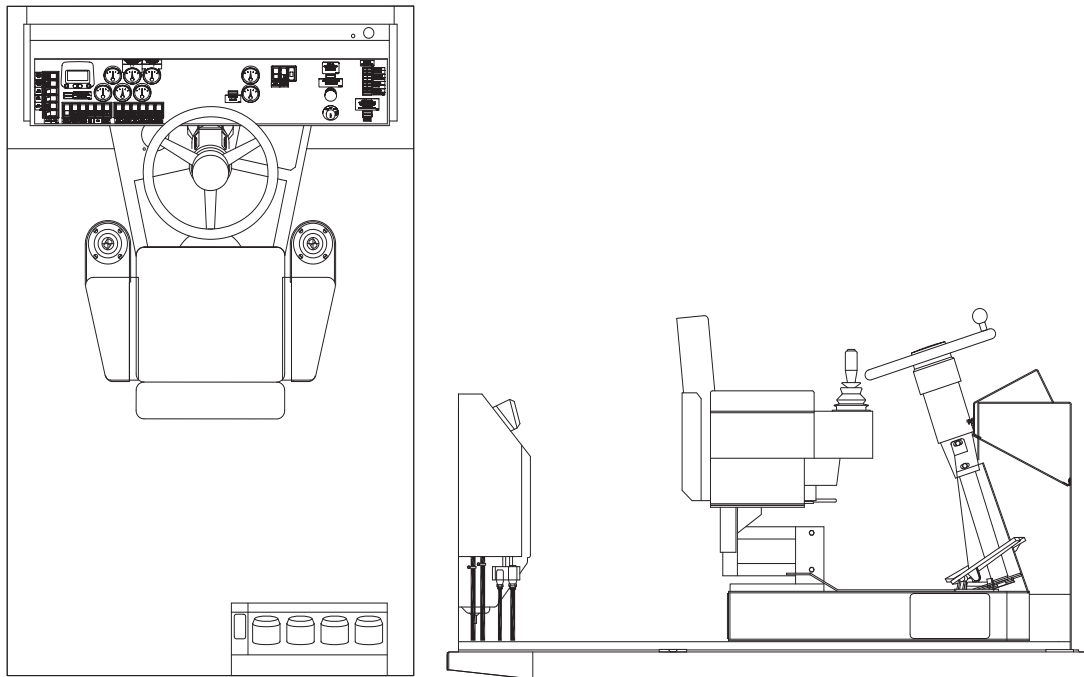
Operator's Cab With Rotate Seat Platform (older version)
